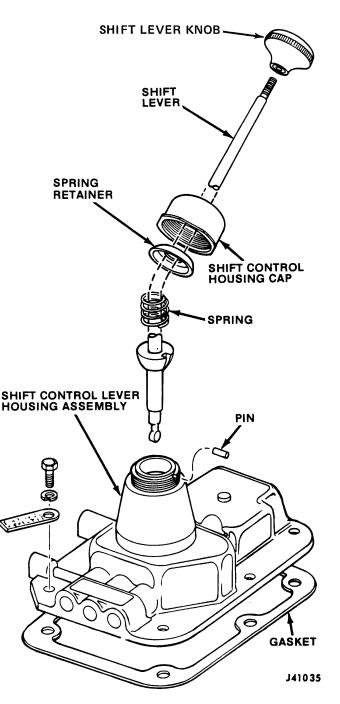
Shift Control Lever Housing Assembly —4-Speed Transmission
